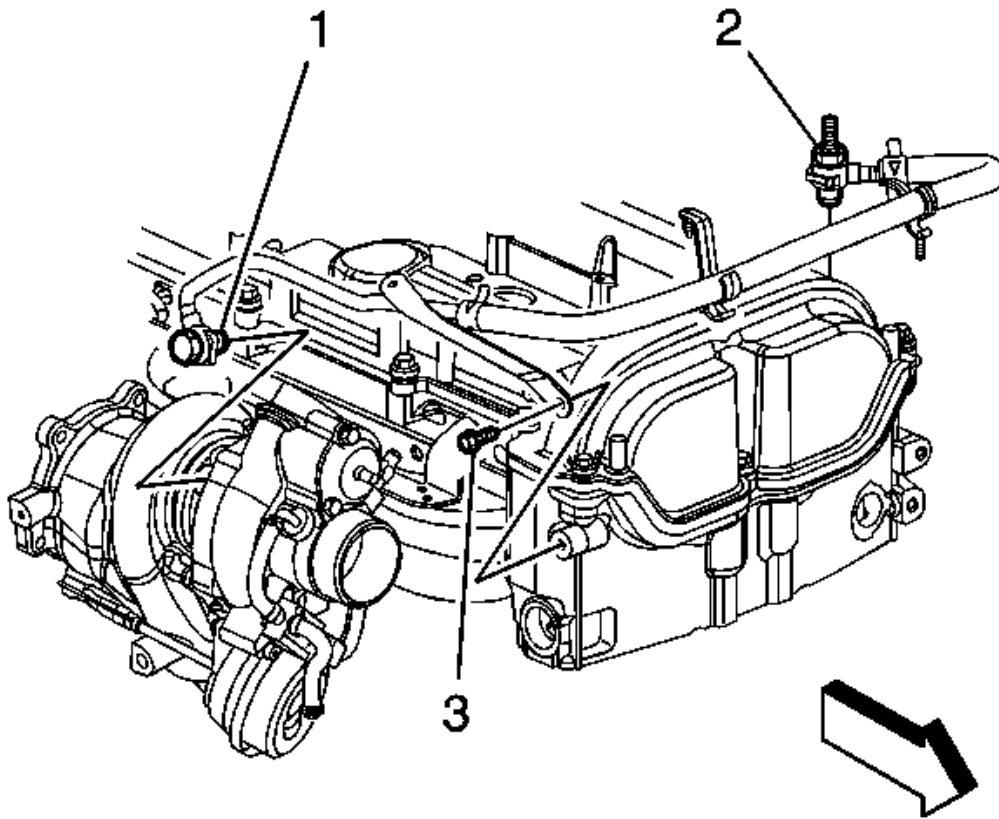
Identifying Turbocharger Coolant Feed Pipe & Bolts
